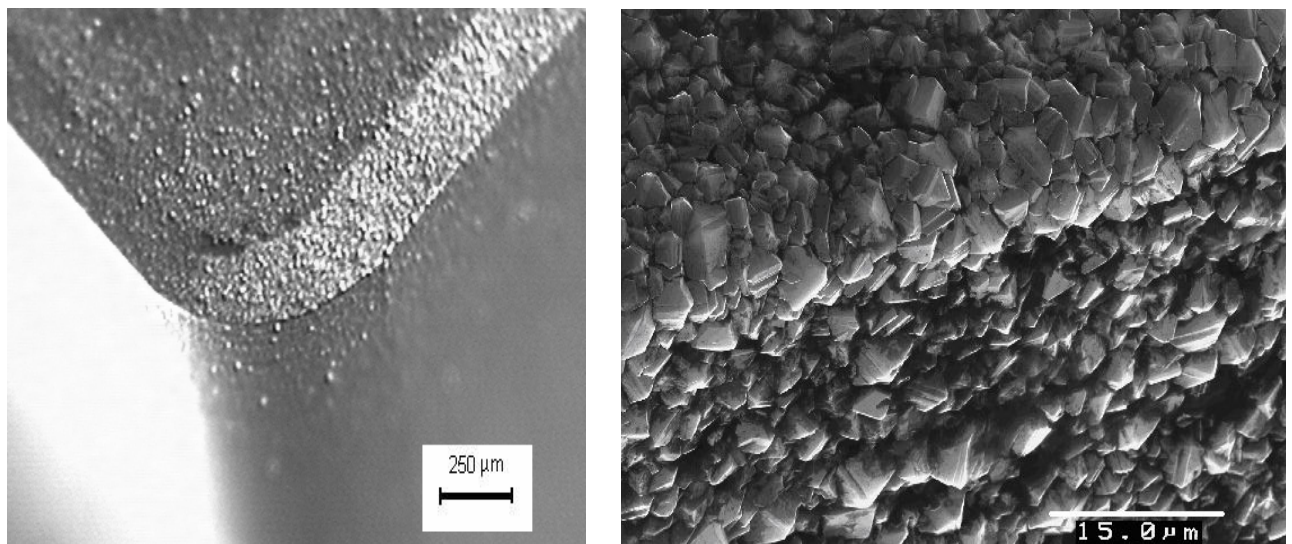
SEM micrographs of the cutting tool: a) surface of the coated cutting tool edge, b) CVD diamond film.
